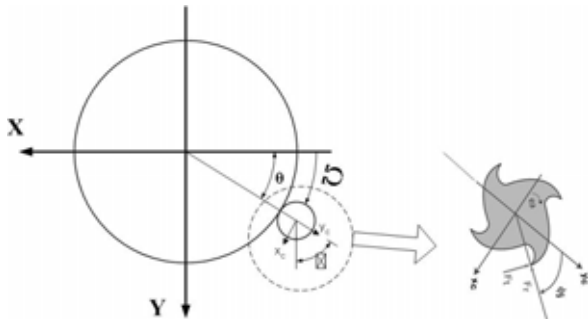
Geometric of tool and workpiece and cutting forces in tangential and radial
